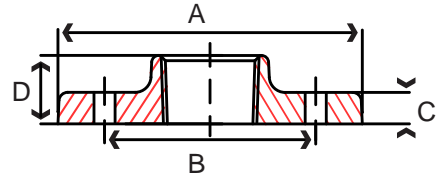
TH1 & 18TH1 – 125 lb. Threaded Companion Flange
